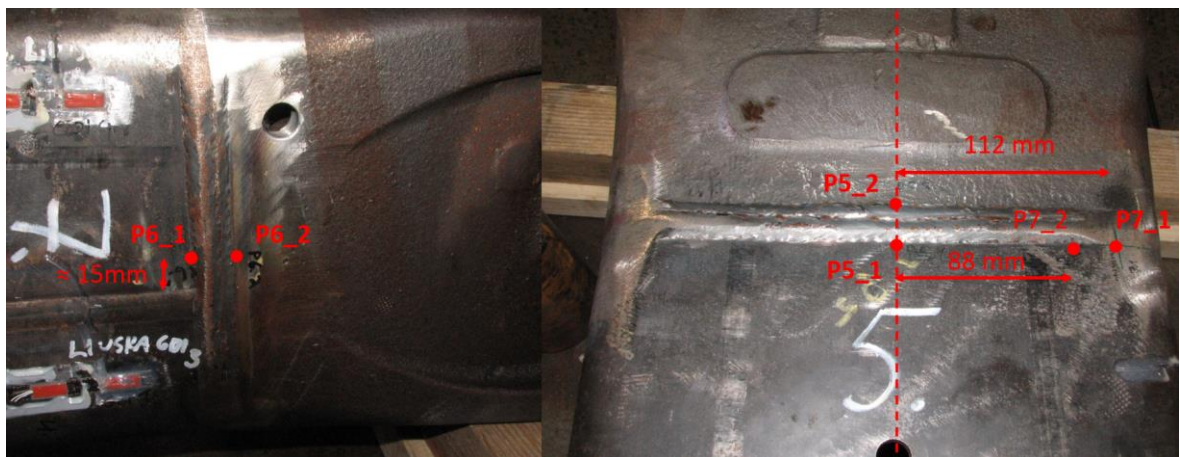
Residual stress measurement locations at the rear end castings top flange.
